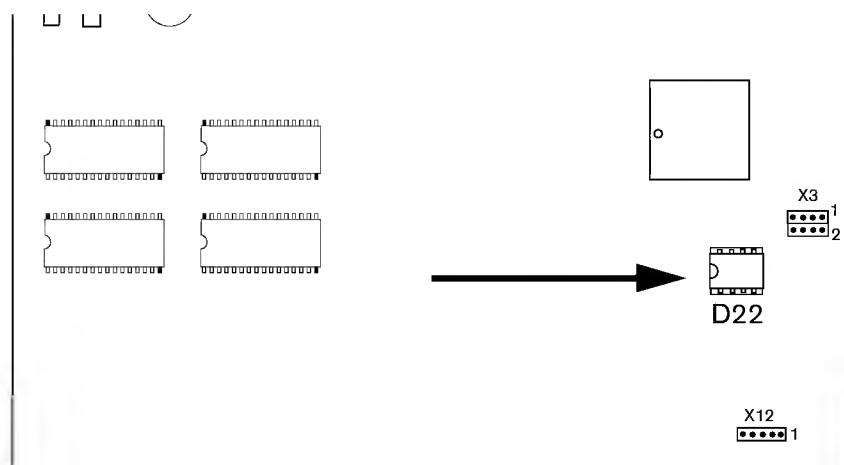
Component mounting diagram of the CPU PCB (replacing the CPU PCB)
